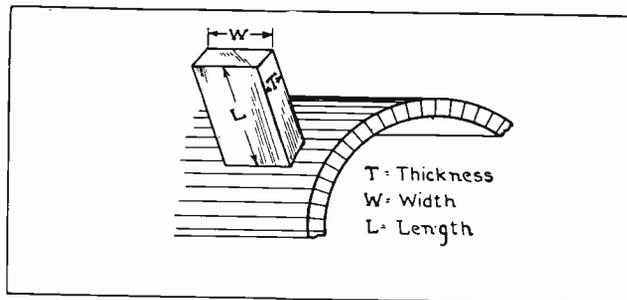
This sketch illustrates the method of taking measurement for the length, width, and thickness of carbon brushes.
